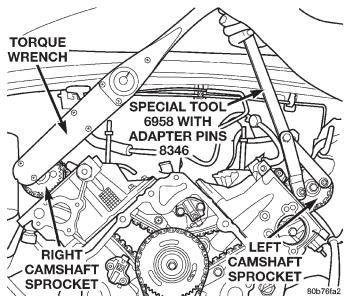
Camshaft Sprocket Installation CRANKSHAFT MAIN BEARINGS
